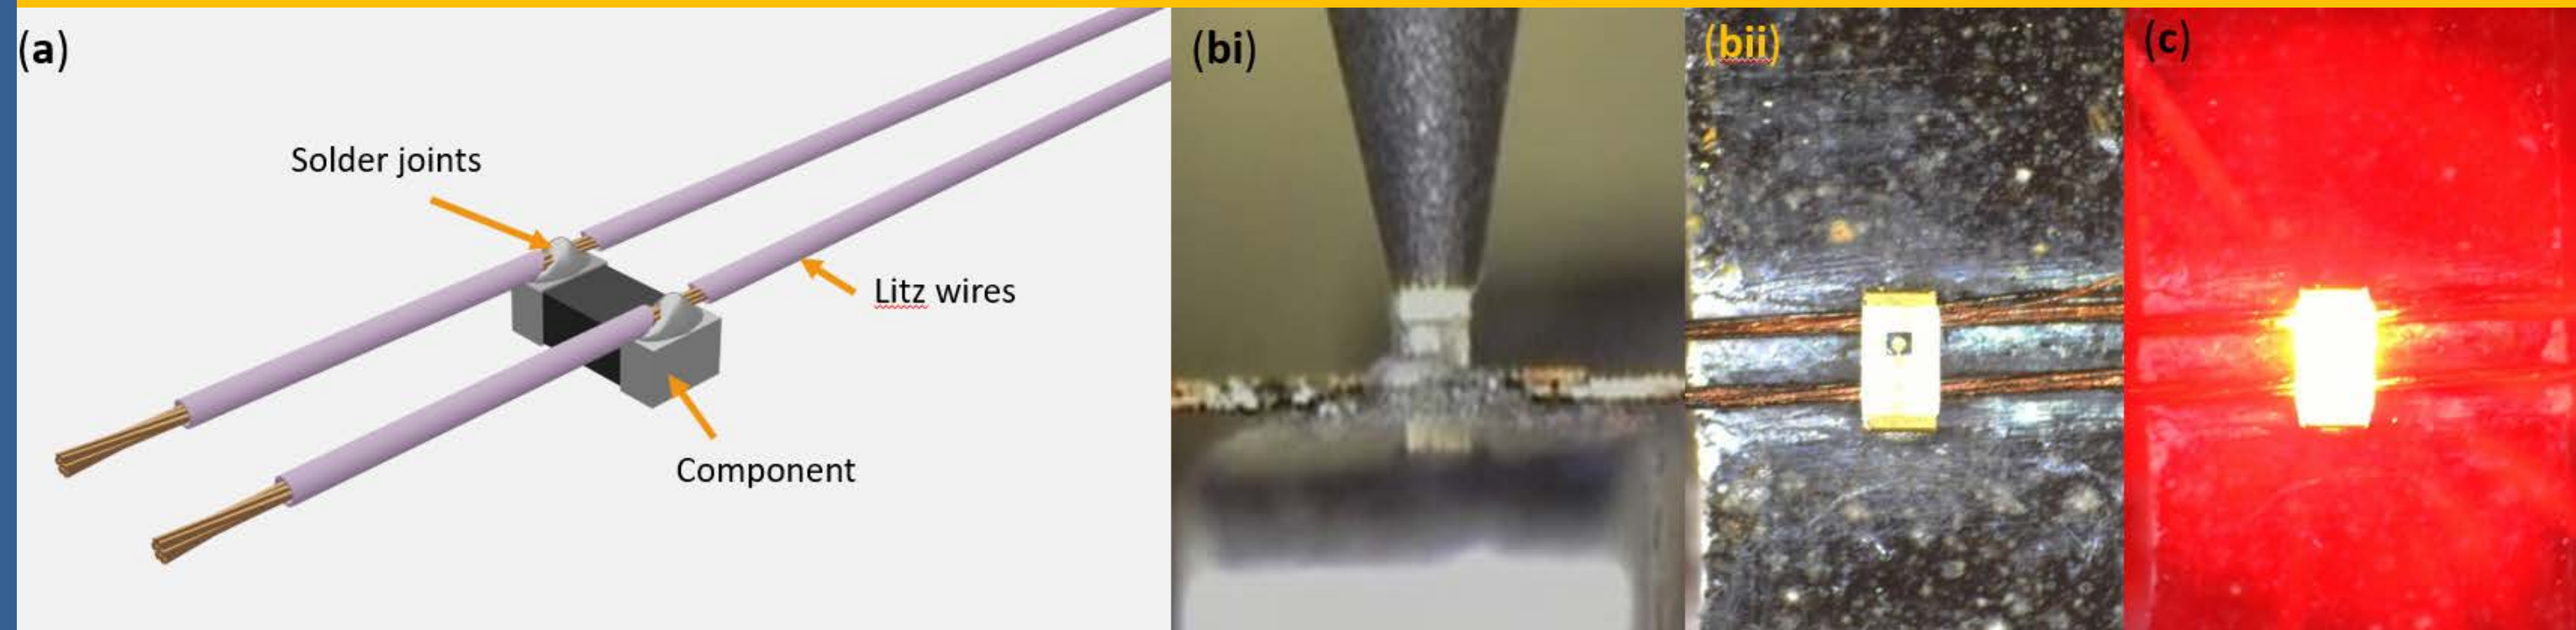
Parallel-soldering stage: (a) Schematic of a soldered component. (b) A soldered light emitting diode (1.0 mm × 0.5 mm × 0.5 mm surface mount device LED) placed onto parallel wires. (c) Quality assurance of functioning component following soldering.
